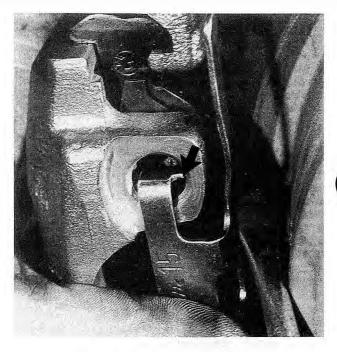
Anti-rattle spring being removed. Unhook spring from caliper housing at arrow.
